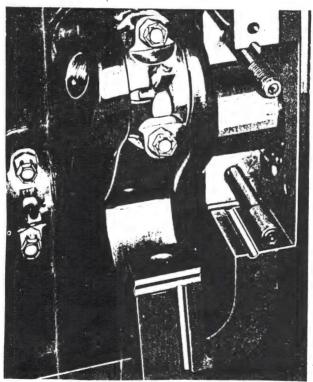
Front Bearing Cap Oil Seal Groove Locations "Hornet" and "Wasp" Series 1955
